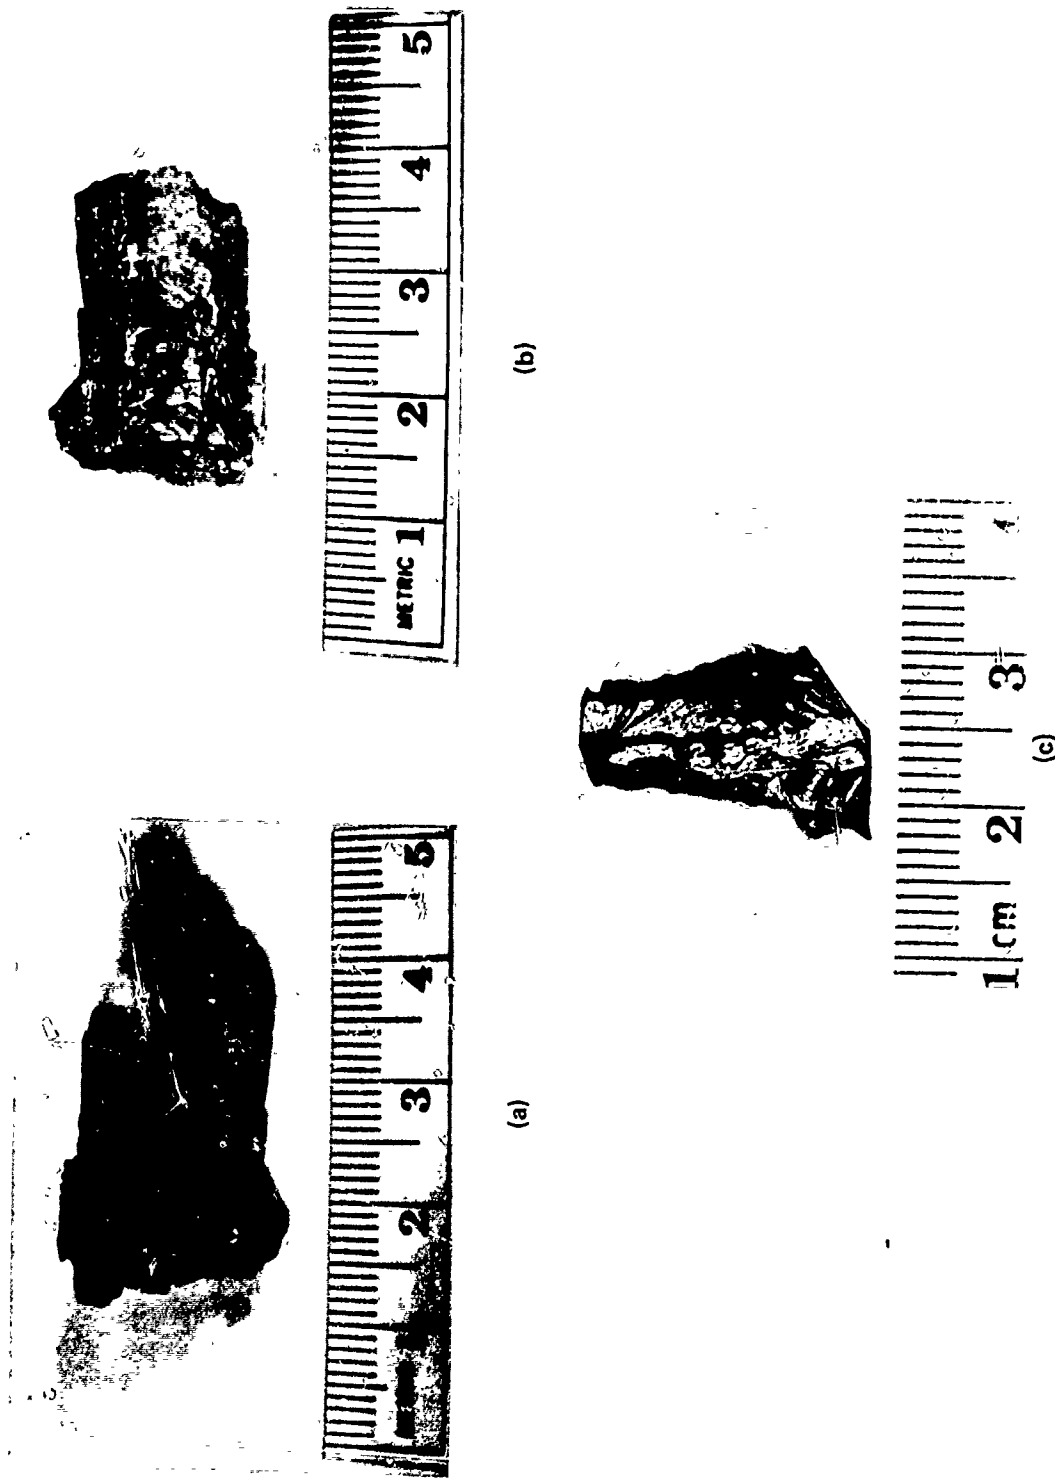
Type 1 HF-1 steel cylinder fragment with heat treatment A showing (a) cylinder end surface, (b) cylinder outer surface, and (c) fragment end surface. Fragment mass: 347.3 gr (22.51 g).
